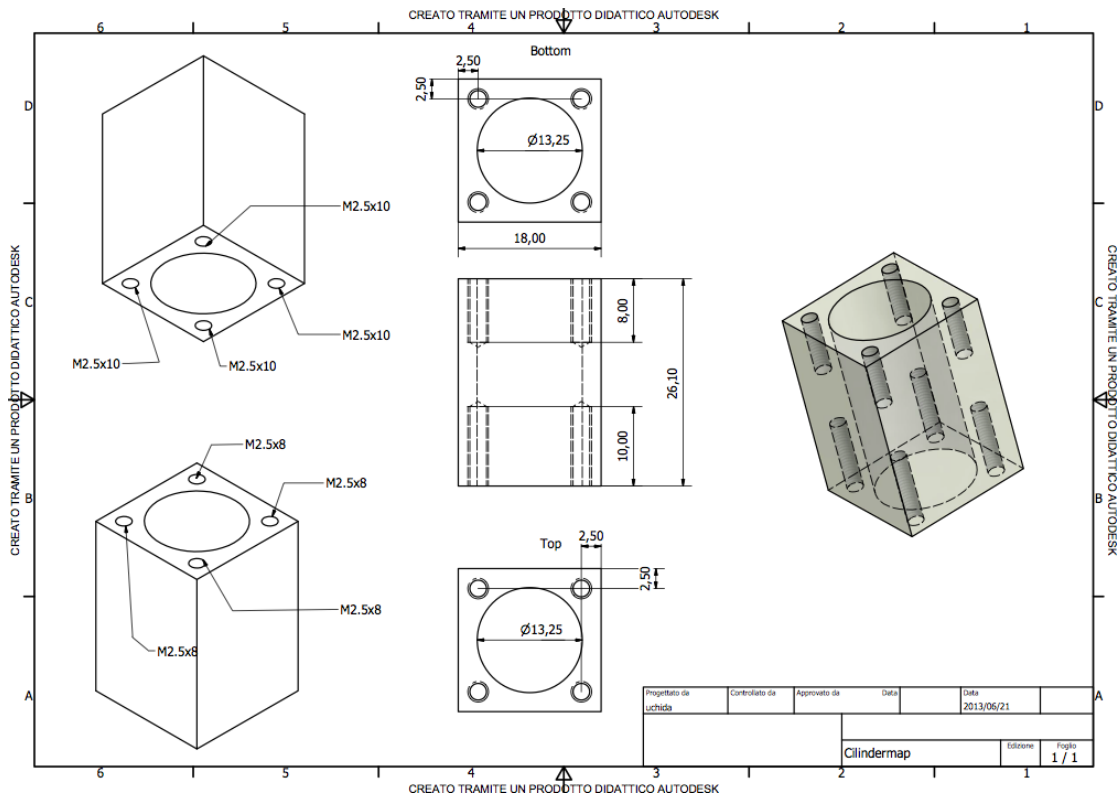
Technical sheet for the desing of the VCA's container. The shape recalls a motor cylinder.
